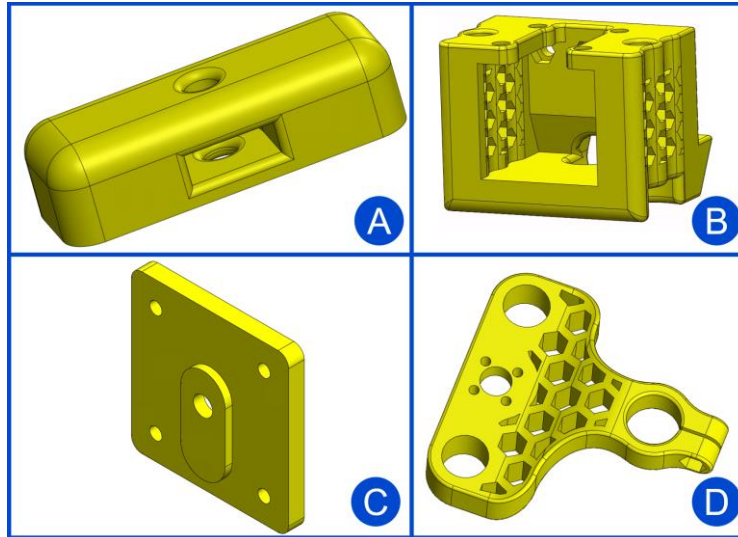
SolidWorks models of 3D printed parts currently on MRP. a) Top of the z-stage system that houses a ball bearing and two linear motion shafts. b) Stepper motor housing with cooling vents, wiring channels, secure nut/bolt attachment system, and linear motion shaft containment. c) Stepper motor adaptors to easily mount the stepper motors to the chassis. d) Syringe holder carriage that encases the linear ball bearings and travel nut on the stepper motor lead screw.
